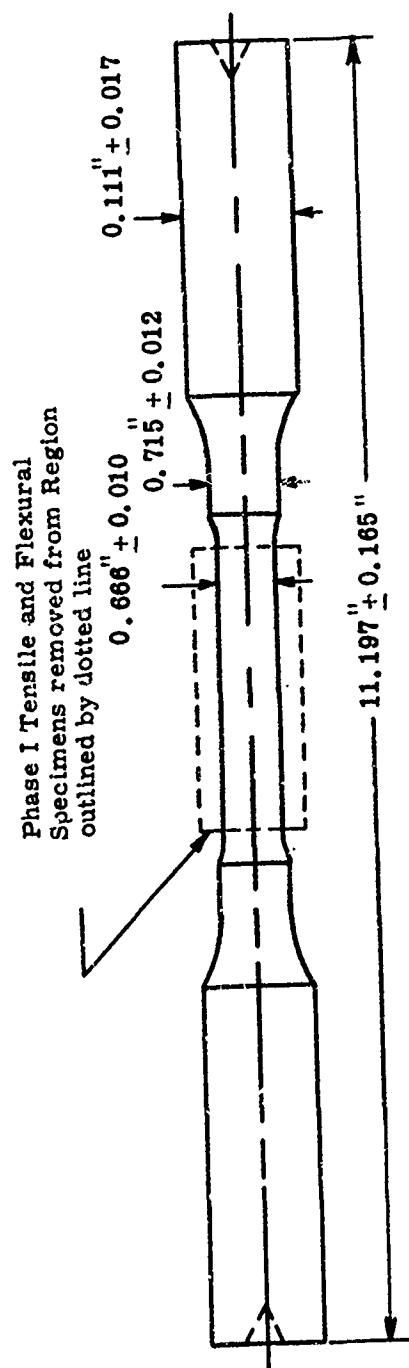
Configuration of Specimen Blank 1831-A-5 as received from Coors and Cutting Plan for Removing Phase I Macro Tensile and Macro Flexural Specimens
